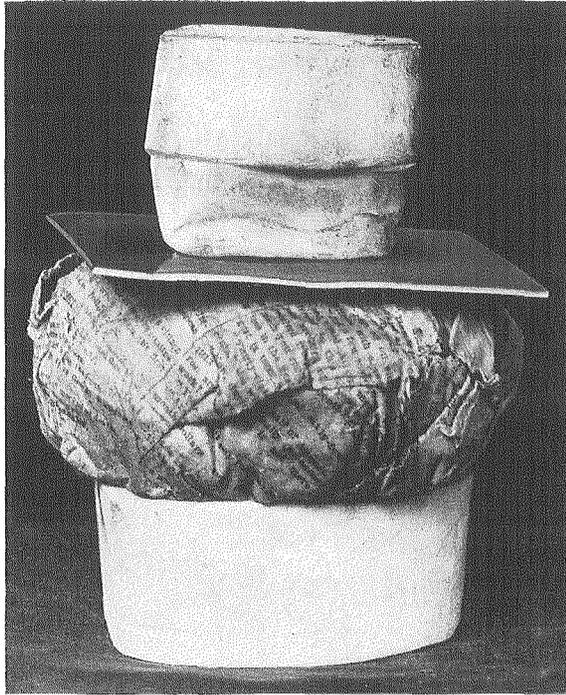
Roll of Damp Paper Adjusted to Counterdie
